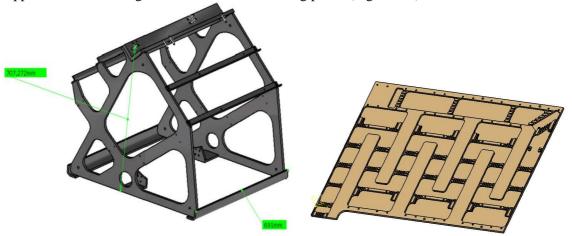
Transport and brazing jig (left) nd brazing bottom plate.
